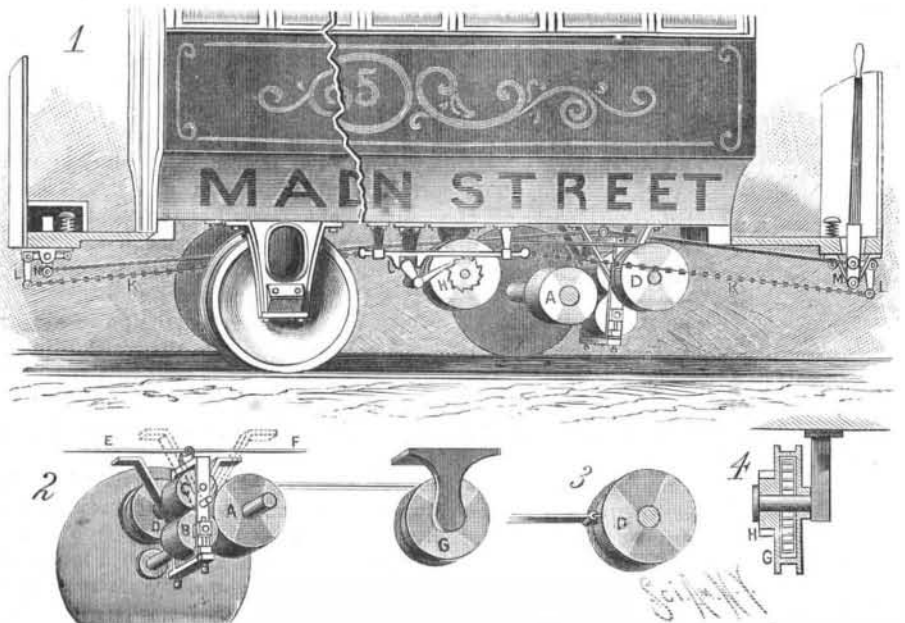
is a perspective view, partly in section, Fig. 2 is a detail perspective view of principal parts of the mechanism, Fig. 3 shows the connection of the spring tension band with the barrel on one of the friction wheel shafts, and Fig. 4 is a vertical sectional elevation of the starter spring, with its barrel or case and attached ratchet wheel. To the axle of the wheels there is fixed a friction drum, A, against which friction wheels, B C, fitted in a frame, are adapted to act, this frame being so pivoted that either of the wheels may be brought into contact with the drum. On the shaft of the friction wheel, C, there is fixed a barrel, D, to which is connected one end of a band or belt, the other end being secured to the periphery of a case or barrel, G, within which is fitted a coiled spring, the case being journaled on a shaft fixed in a hanger pendent from the car body. One end of this spring is fixed to the shaft, and the other end to the case, to which also is fixed a ratchet wheel, H, with which a dog pivoted in a hanger fixed to the car body is adapted to engage to prevent the unwinding of the spring until the dog is tripped. The connection of the band with the barrel, D, is such as to allow the band to wind in either direction on the barrel. To the top of the pivoted friction wheel frame there are connected two rods, E F, extending to either end of the car, where they are connected with levers, M, whereby the contact of the friction wheels, B C, with the axle drum, A, is controlled. The dog pivoted to a hanger on the car body, and adapted to engage the ratchet wheel, H, on the spring barrel, G, is connected by chains, K, to elbow levers, L, at either end of the car, operated by foot plates attached to the platform.
